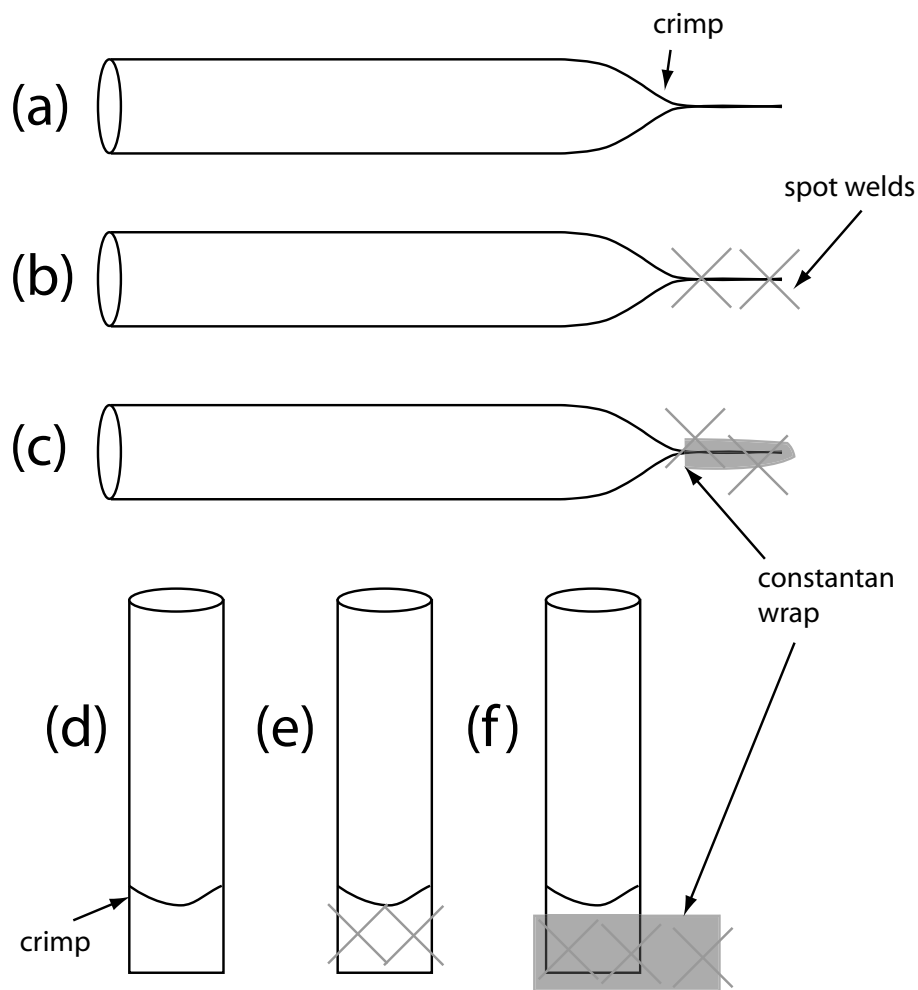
Oven crimping illustration. Crimping the ovens shut on the back side keeps the atomic source from leaking out. (a) (side view) and (d) (top view) illustrate where to crimp the oven tube flat. The, by spot welding the crimped area, (b) and (e), the tube becomes sealed. Then adding a Constantan flag, (c) and (f), allows us to attach a lead to the flag without having to spot weld the oven tube again.
